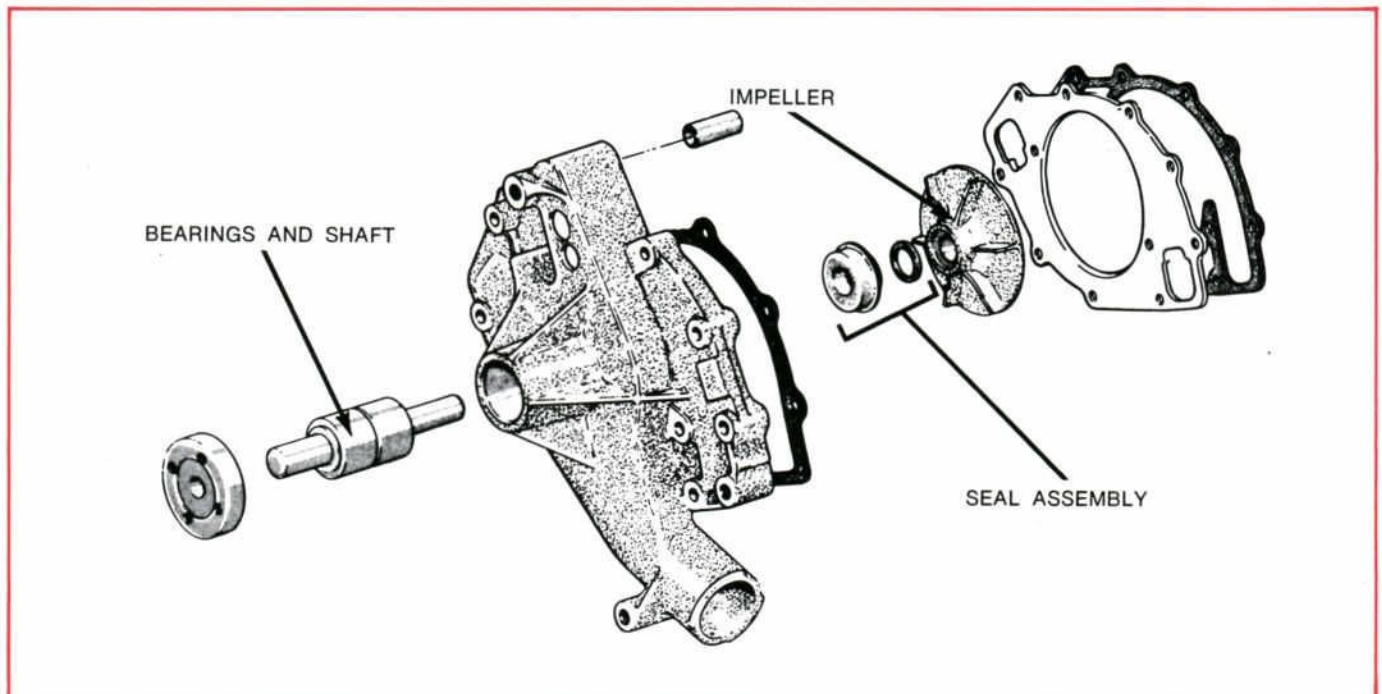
Typical Water Pump Parts. This is an Exploded View of a 1968 Pump Installation in a 460 CID Ford-Built Engine.
